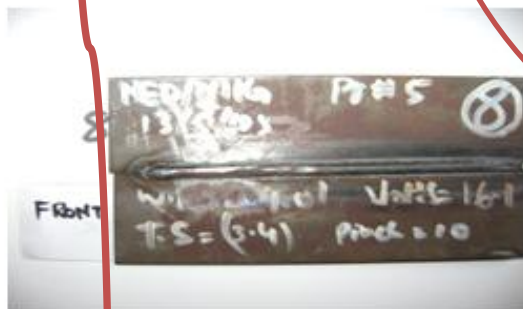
weld bead from Ex # 8 (front)
